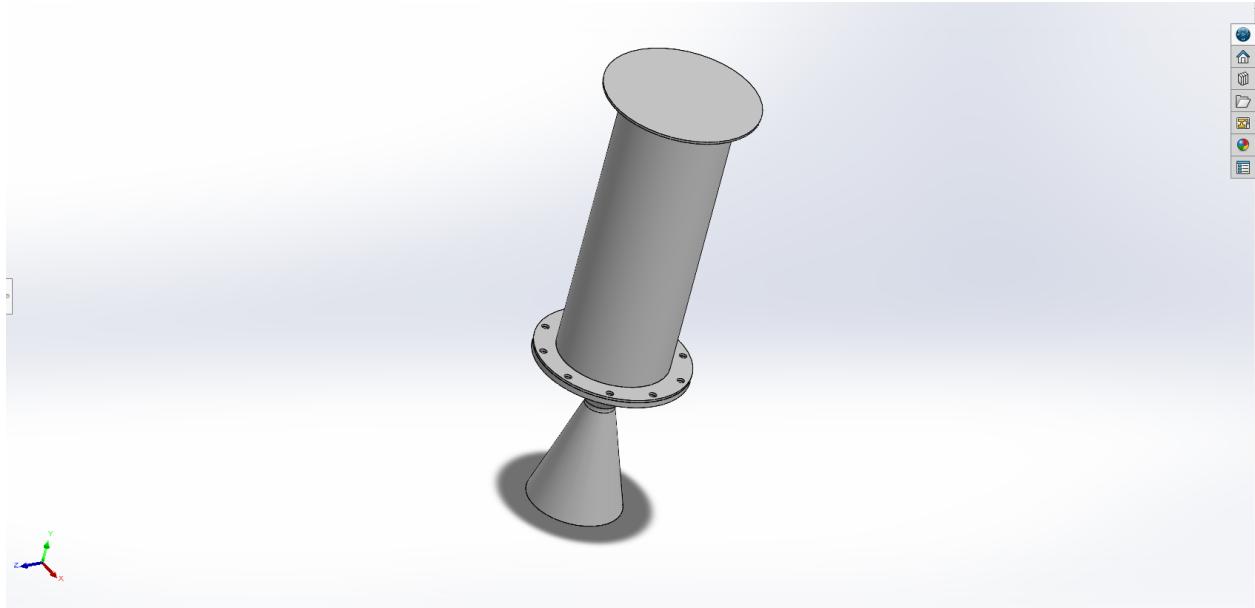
3D CAD Assembly of Solid Rocket Motor
